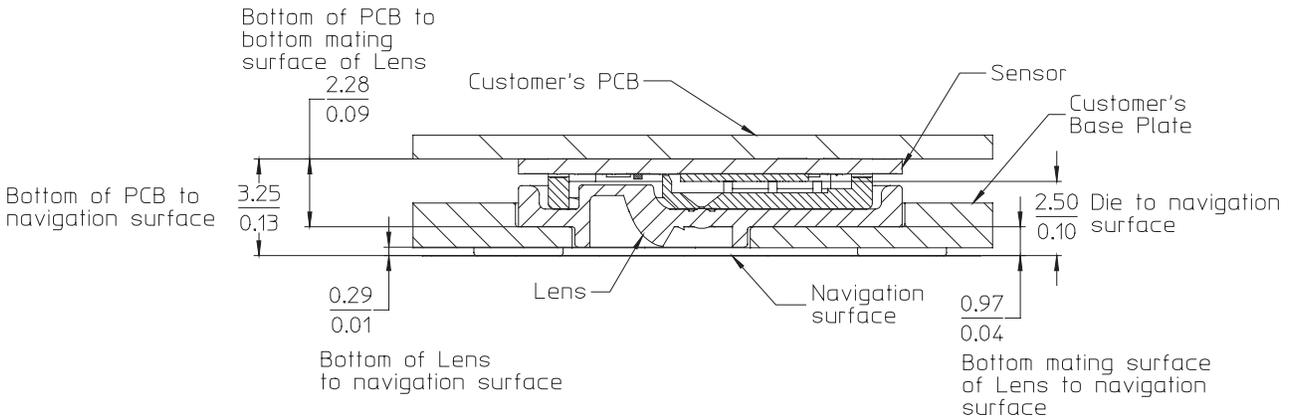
ADNS-3530 assembly cross section view (PCB without cut-out)
